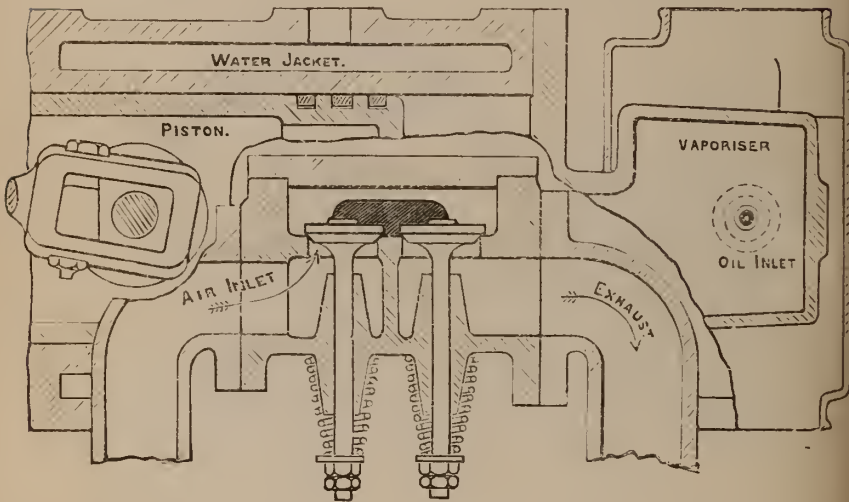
Section through cylinder and valves of the "Hornsby-Akroyd" Oil Engine.
